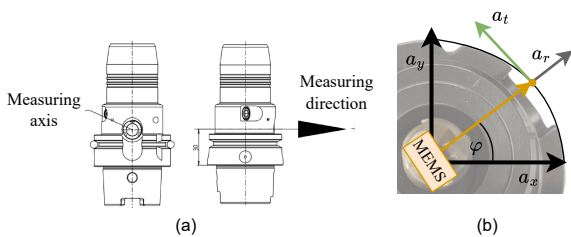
(a) Side view of the toolholder with the integrated 1-axis MEMS sensor. (b) Top-down view of the toolholder, illustrating how the sensor measures acceleration in the xy -plane, depending on the rotation angle φ .
